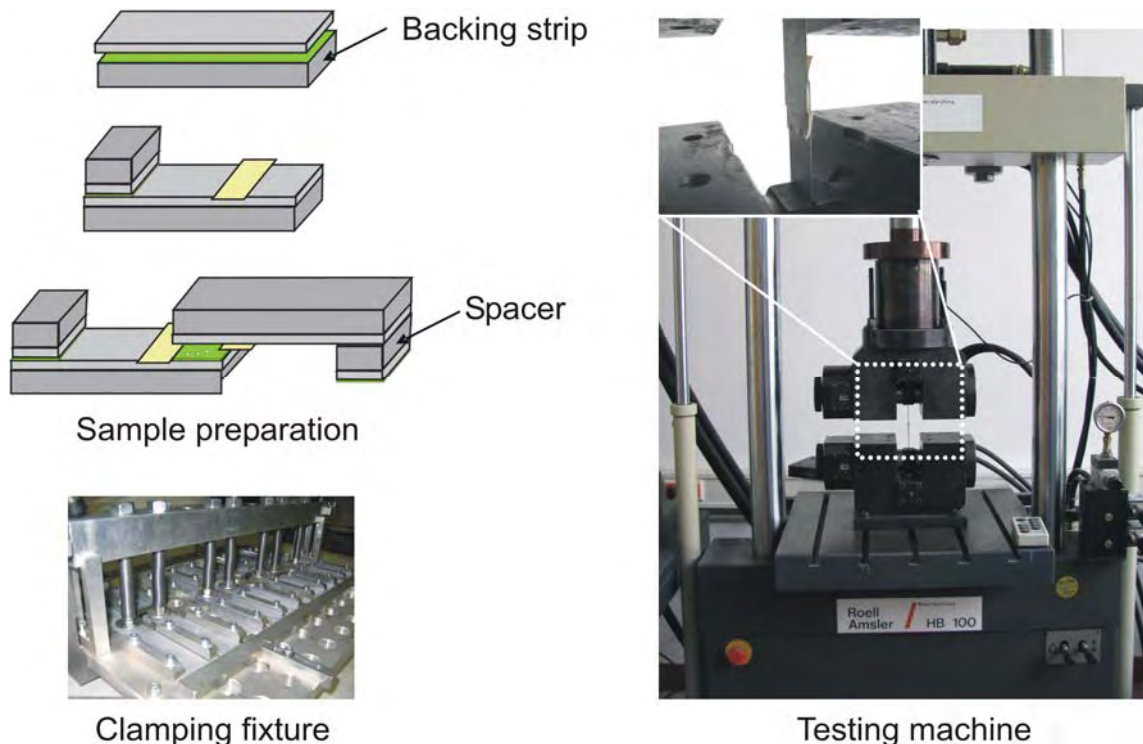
Shear Test; Left: Sample Preparation; Right: Testing Equipment
